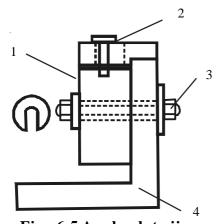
Angle plate jig 1. Work 2. Bush 3. Stud bold 4. Angle plate
